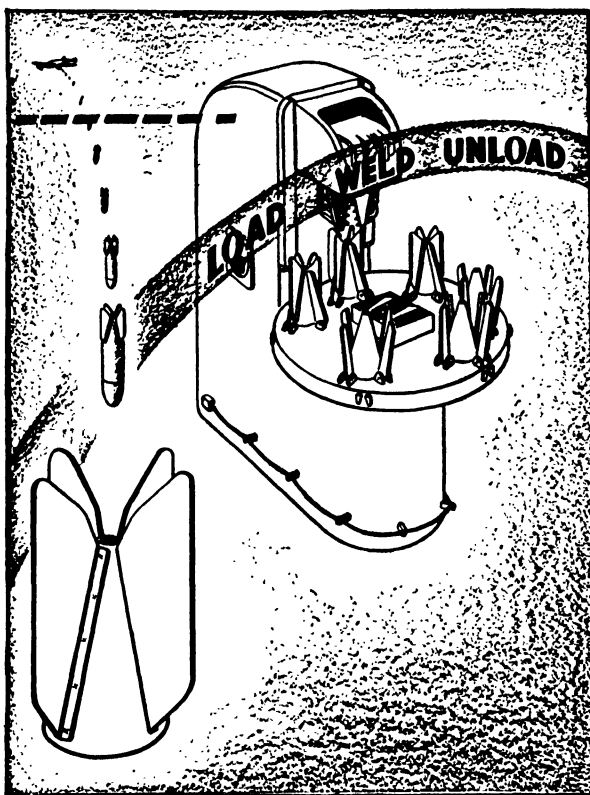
This is a "Progressomatic" dial-feed welding machine for assembling and spot-welding bomb fins. (Courtesy of Progressive Welder Company.)
